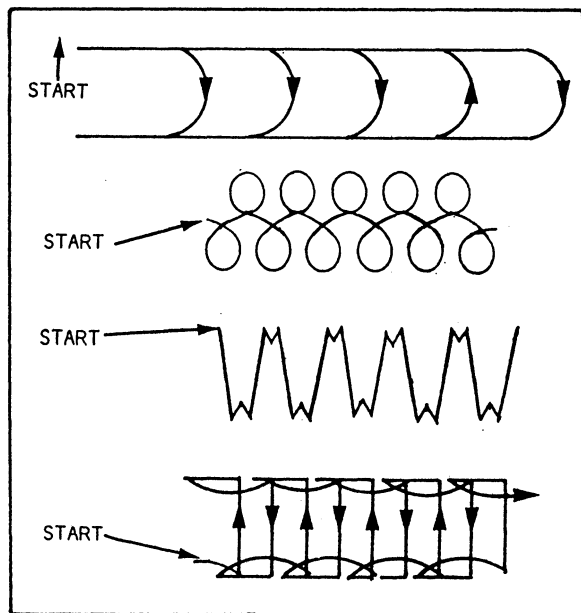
Weave motions used in manual shielded arc welding.
